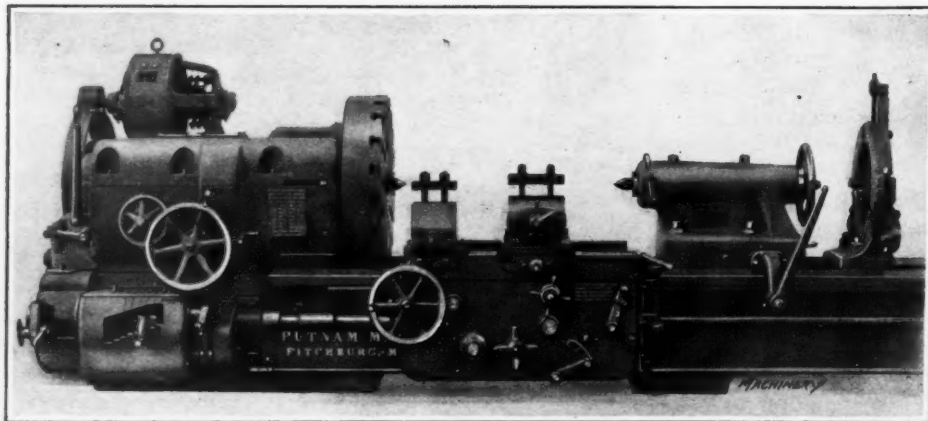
Putnam 42-inch Engine Lathe for machining Gun Forgings
